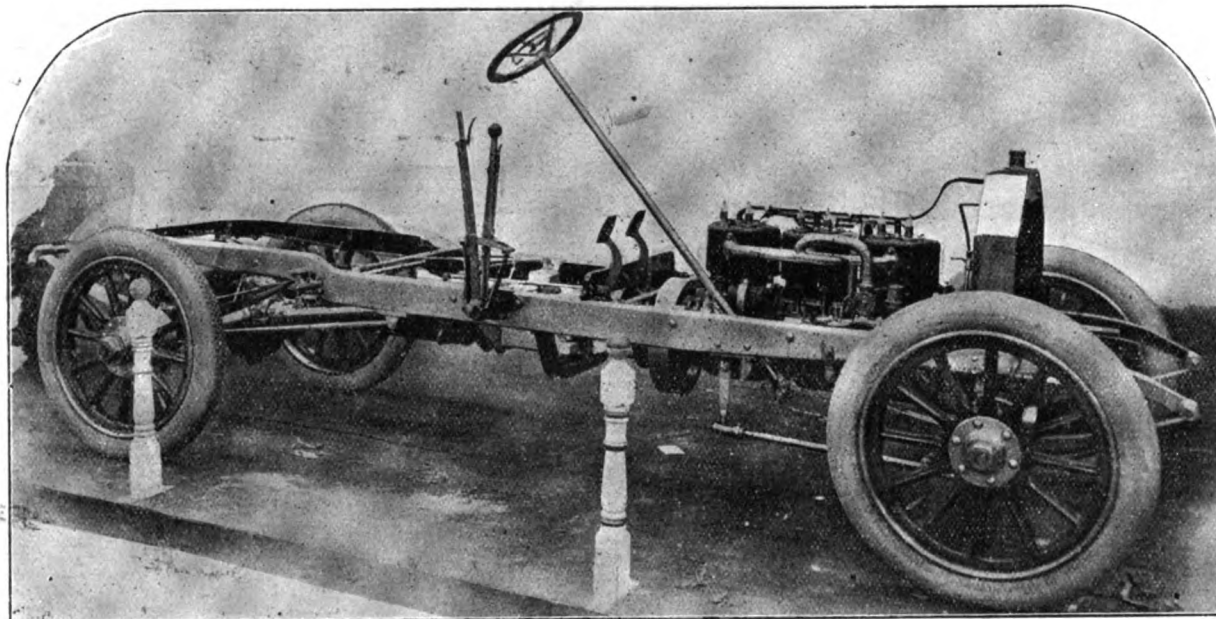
Chassis of the Brooke 25-h.p. Six-Cylinder Car.
